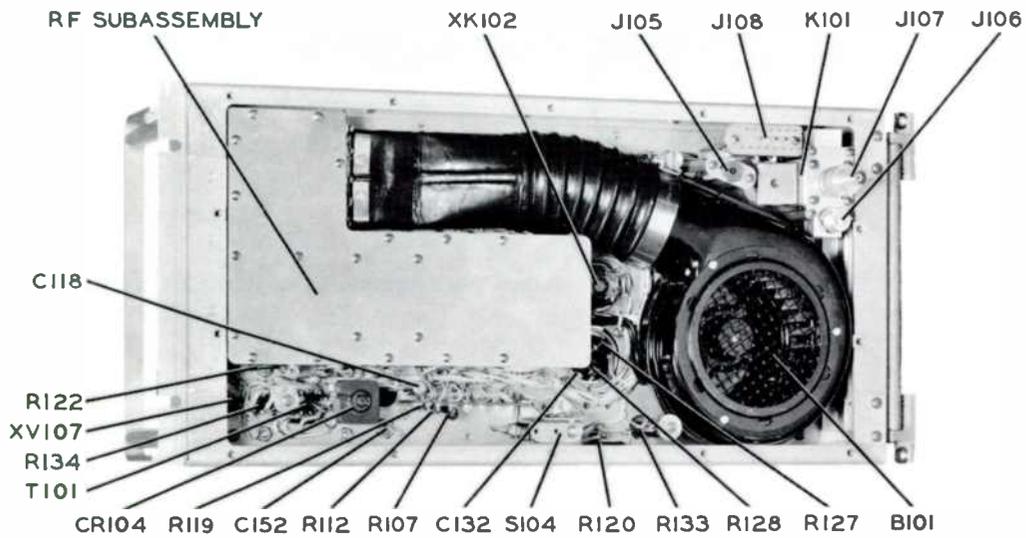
R-F Unit, Rear View, Dust Cover Removed
